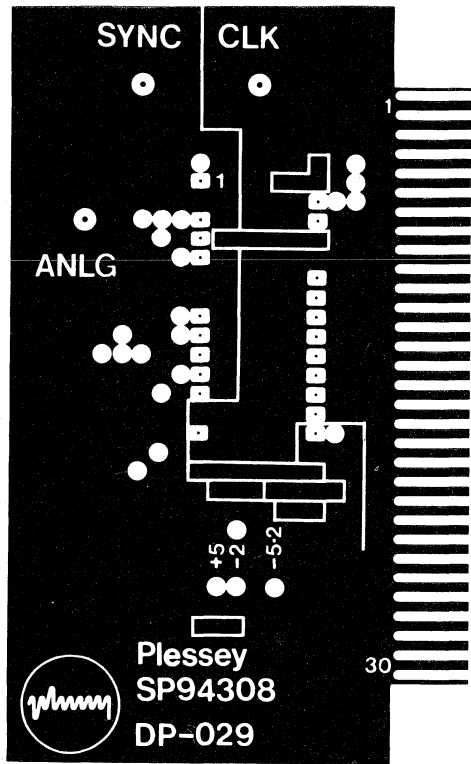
(b) AP9008 PCB ground plane and component side (1:1)
